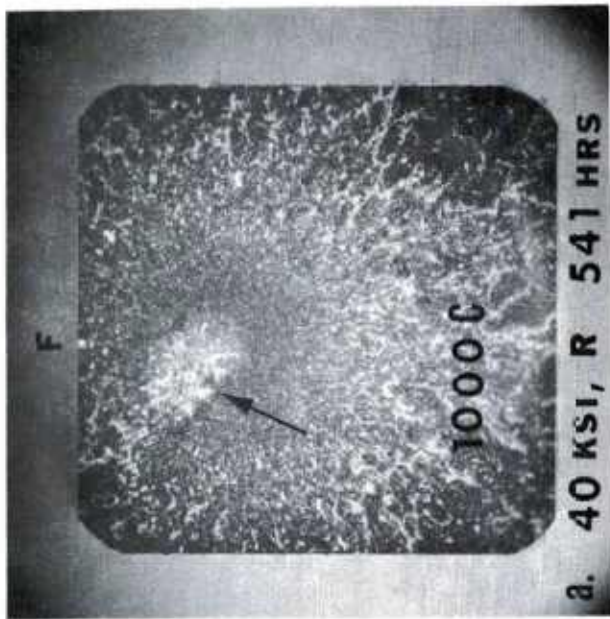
Fracture surface of the other half of the specimen (#33) seen in Fig. 56(b).
